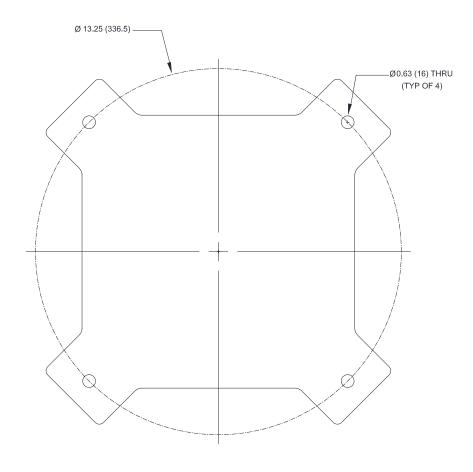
Flashhead/Beacon FTS 371 FH mounting and outline view
